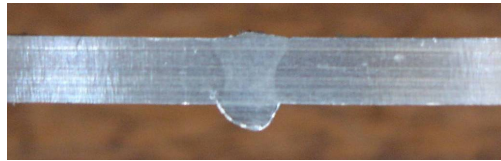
AA6061-T6 LB welded specimen weld bead overfill.
